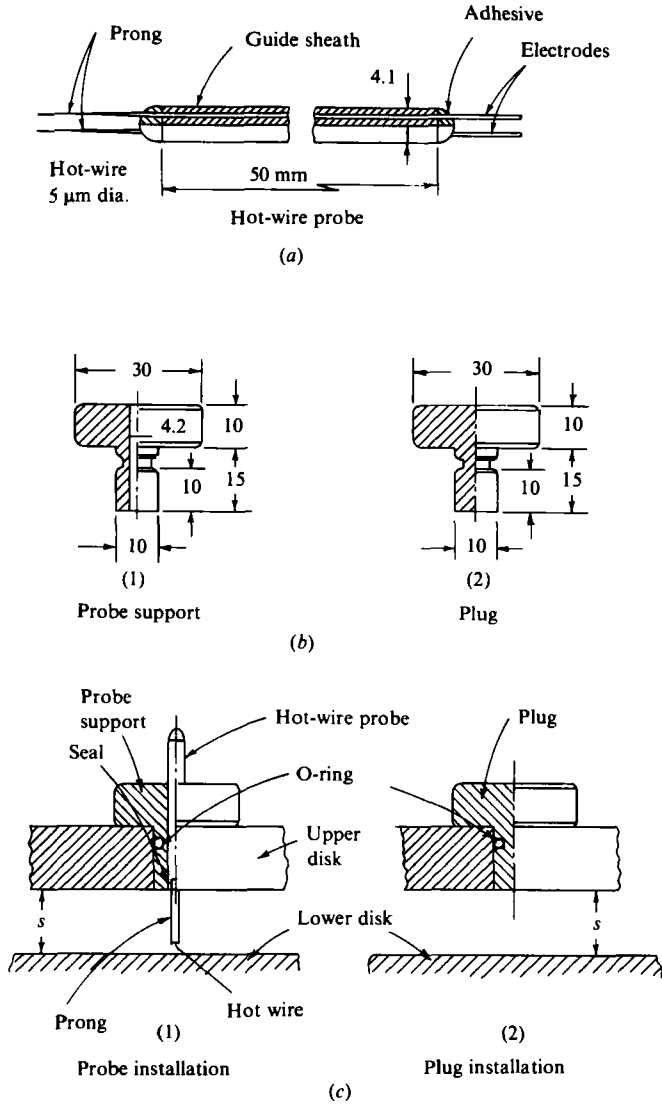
Details of (a) hot wire, (b) plug and (c) their installations.
